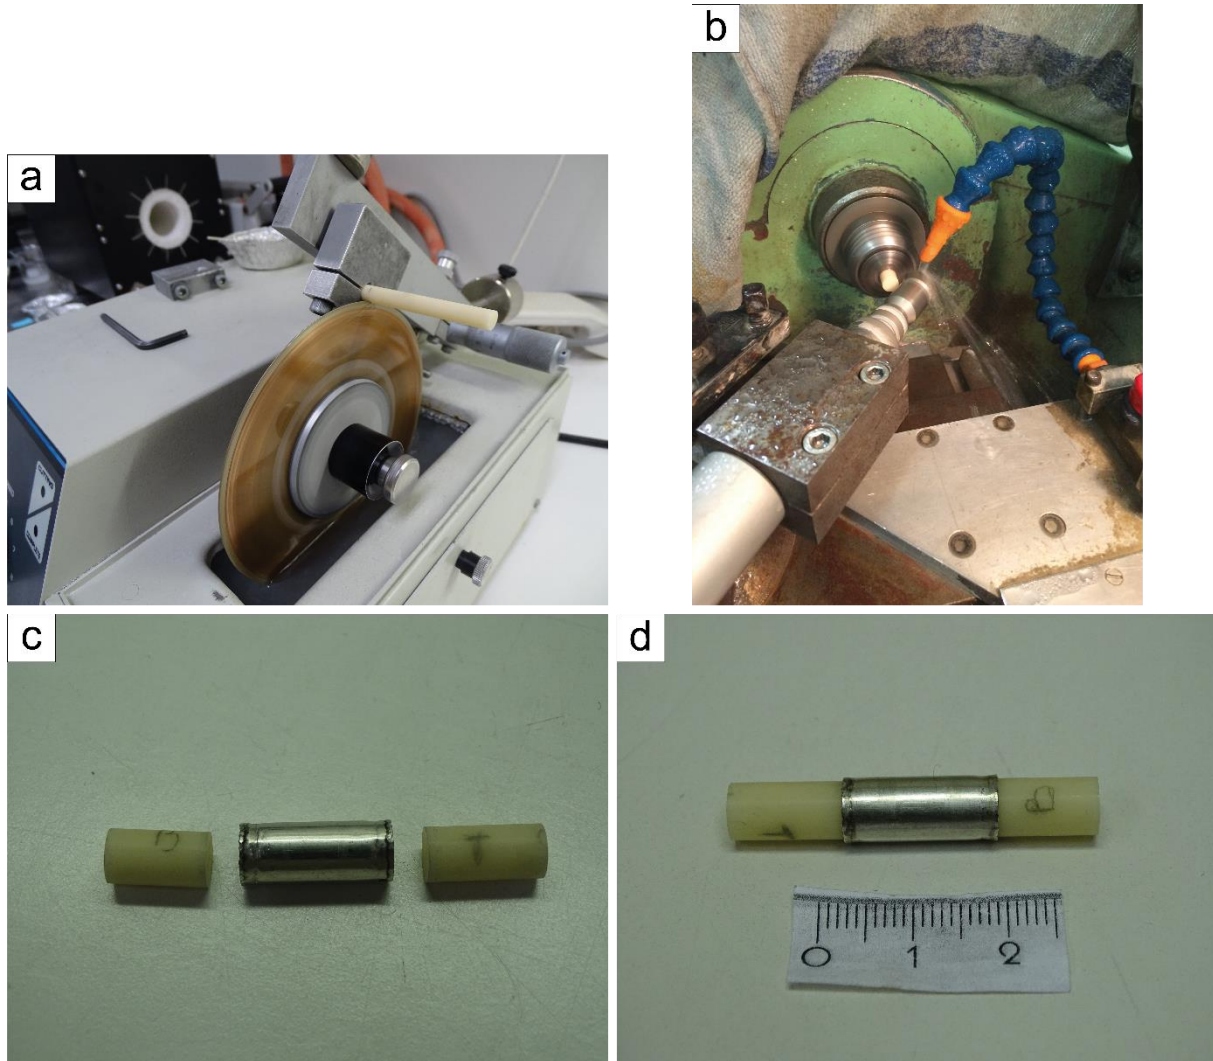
(a) The alumina pistons are cut with a diamond saw (1-2 mm more than the desired size). (b) The pistons ends are then plane parallelized and their length adjusted with the lathe machine equipped with a diamond grinding tool under water flow. (c) The two pistons are positioned at the ends of the jacket. They have to fit inside the two cups. (d) The pistons are inserted at the jacket ends.
